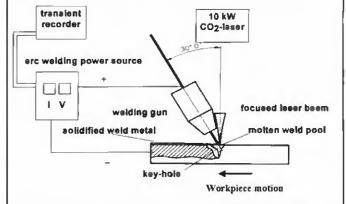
Are-laser or laser-ure arrangement with respect to welding direction Fig. 4 — Schematic drawing of experimental setup. (Ref. 8).
